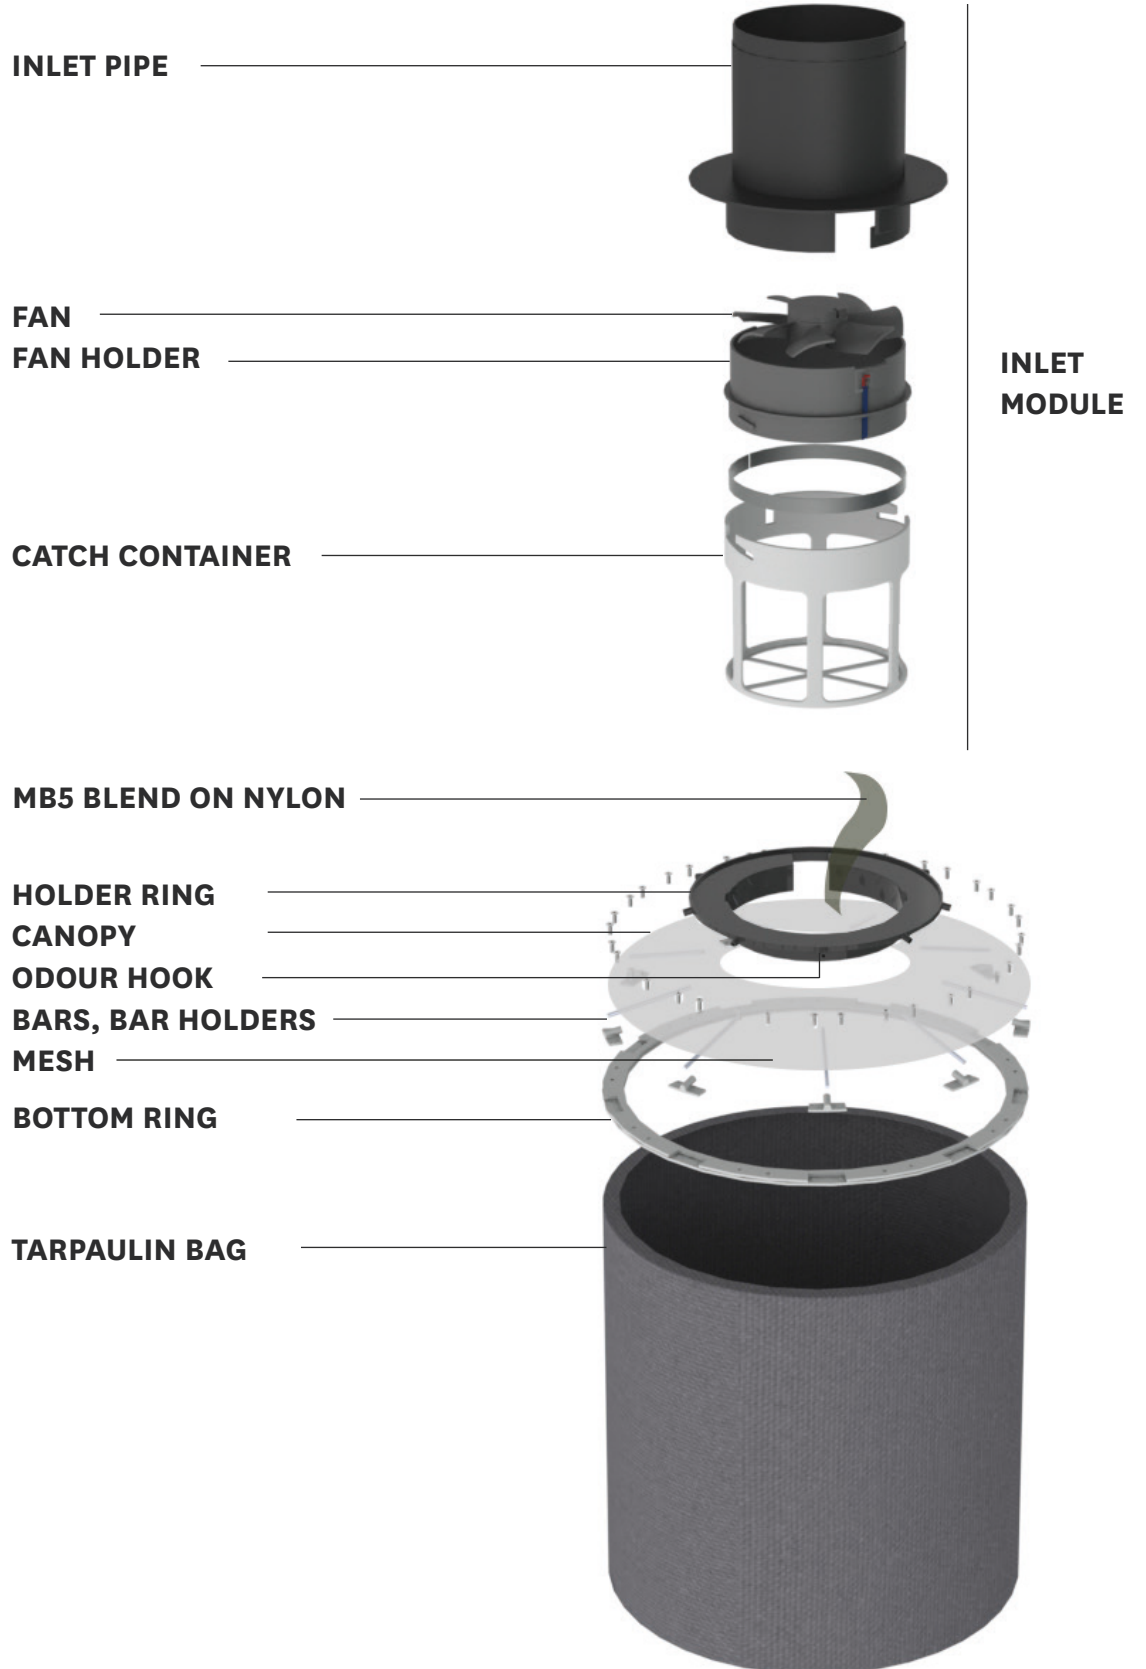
An exploded view render of the M-Tego prototype. Notice the number of parts in the canopy: 11 3D printed parts, 9 metal rods, and 36 bolts and nuts.
